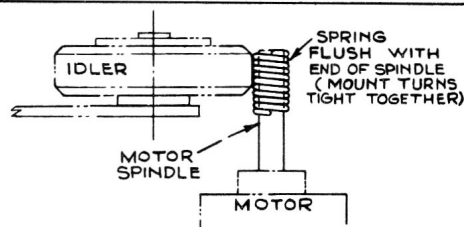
Spring Sleeve Installed on 60-Cycle Motor Spindle for Operation on 50-Cycle Supply.
